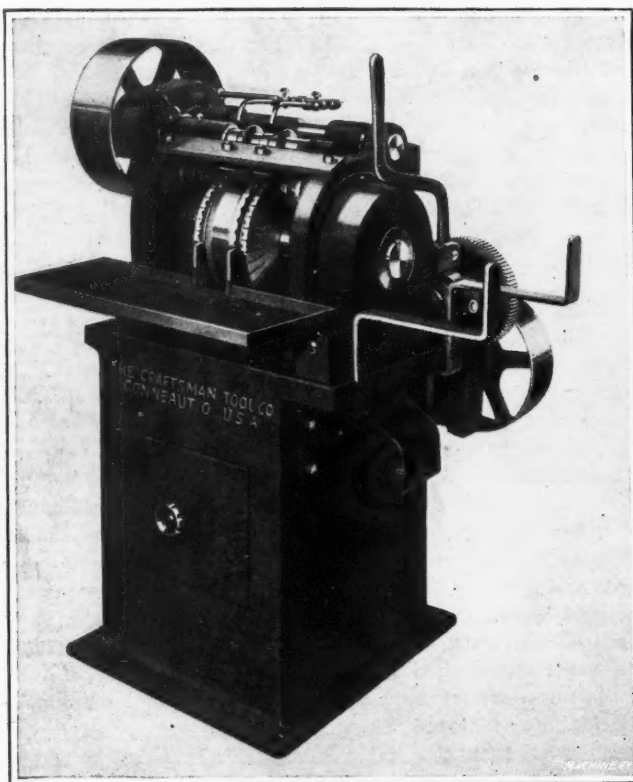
Craftsman No. 2 Continuous Rotary Milling Machine, which has Two Work-holding Chucks
